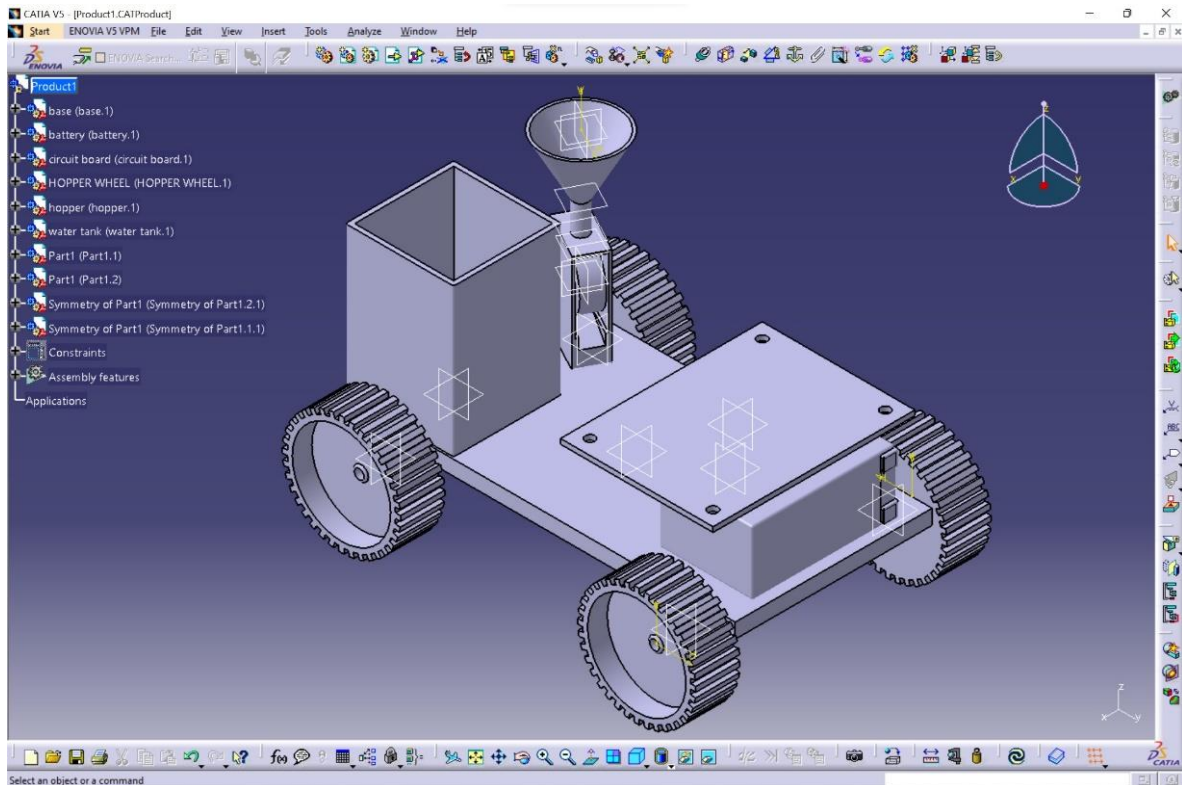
Asselbly of Seed Sowing without Drill Bit Assembly
